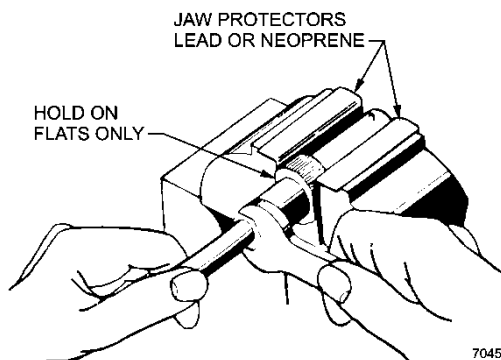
Tightening Braid Clamp Nut into Plug or Jack Body
